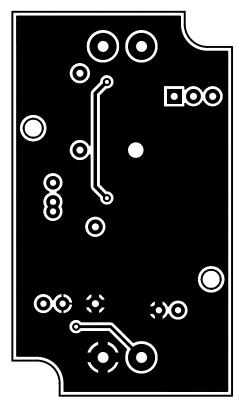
SMPS PCB Copper Pattern (Bottom Layer)
